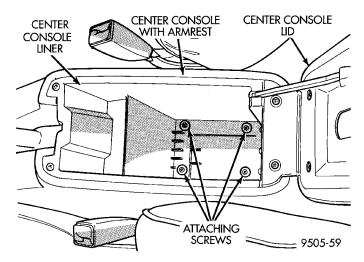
Attaching Screws At Rear Of Center Console With Arm Rest
